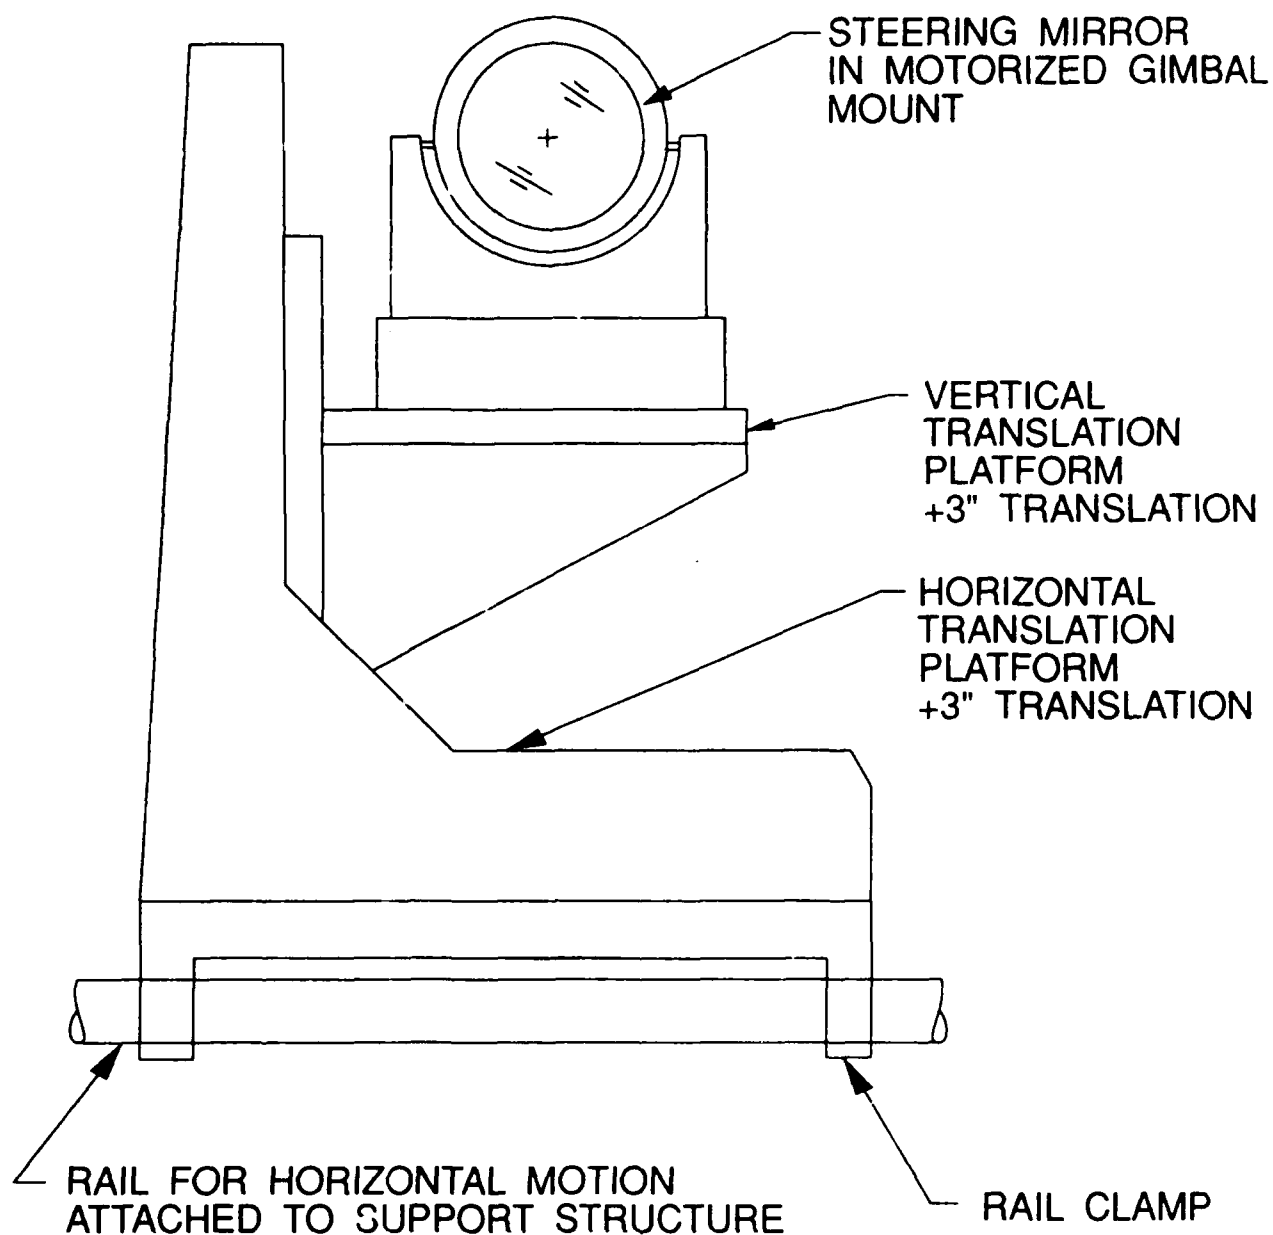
A sketch of the transmitter steering mirror mount and mount support. The mount support holds the mirror in the collimator tube.
